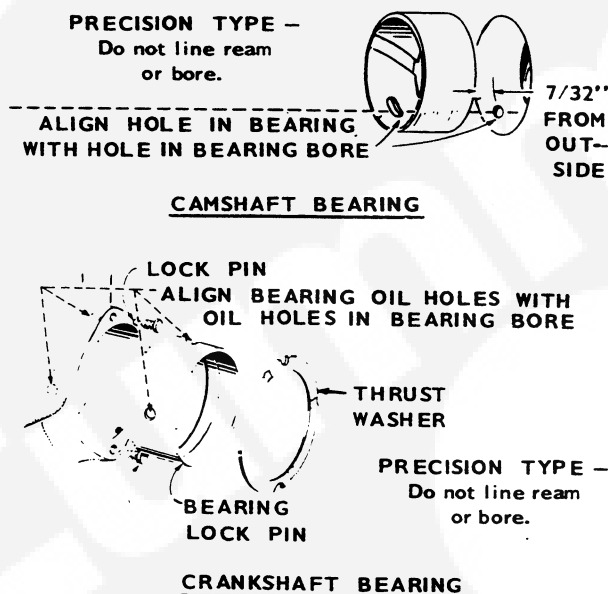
INSTALLATION OF CAM AND CRANKSHAFT BEARINGS
